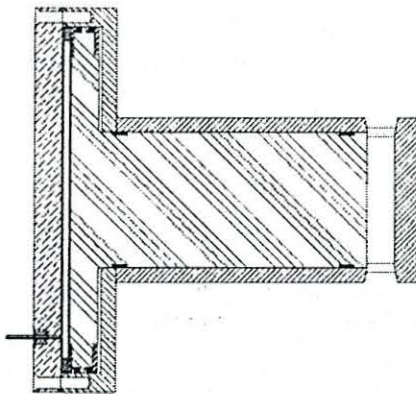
Bellows, piston, and anvil assembly that is inserted into the bore of the slip pair magnets. The outside diameter of the piston and anvil housing is a little less than the magnet bore of 150 mm.
